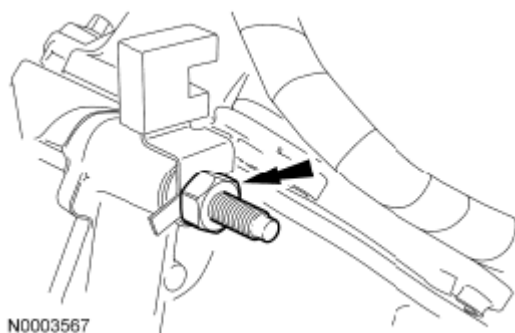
Identifying Radio Ignition Interference Capacitor And Stud Bolt
